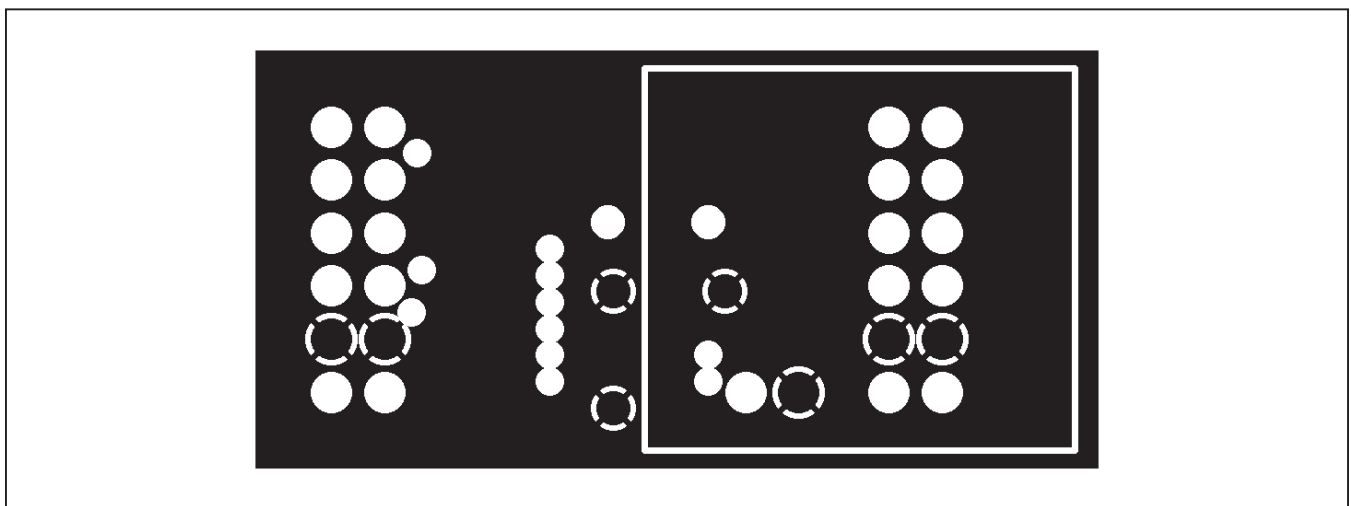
MAX14850PMB1 Peripheral Module PCB Layout—Inner Layer 1 (Ground)
